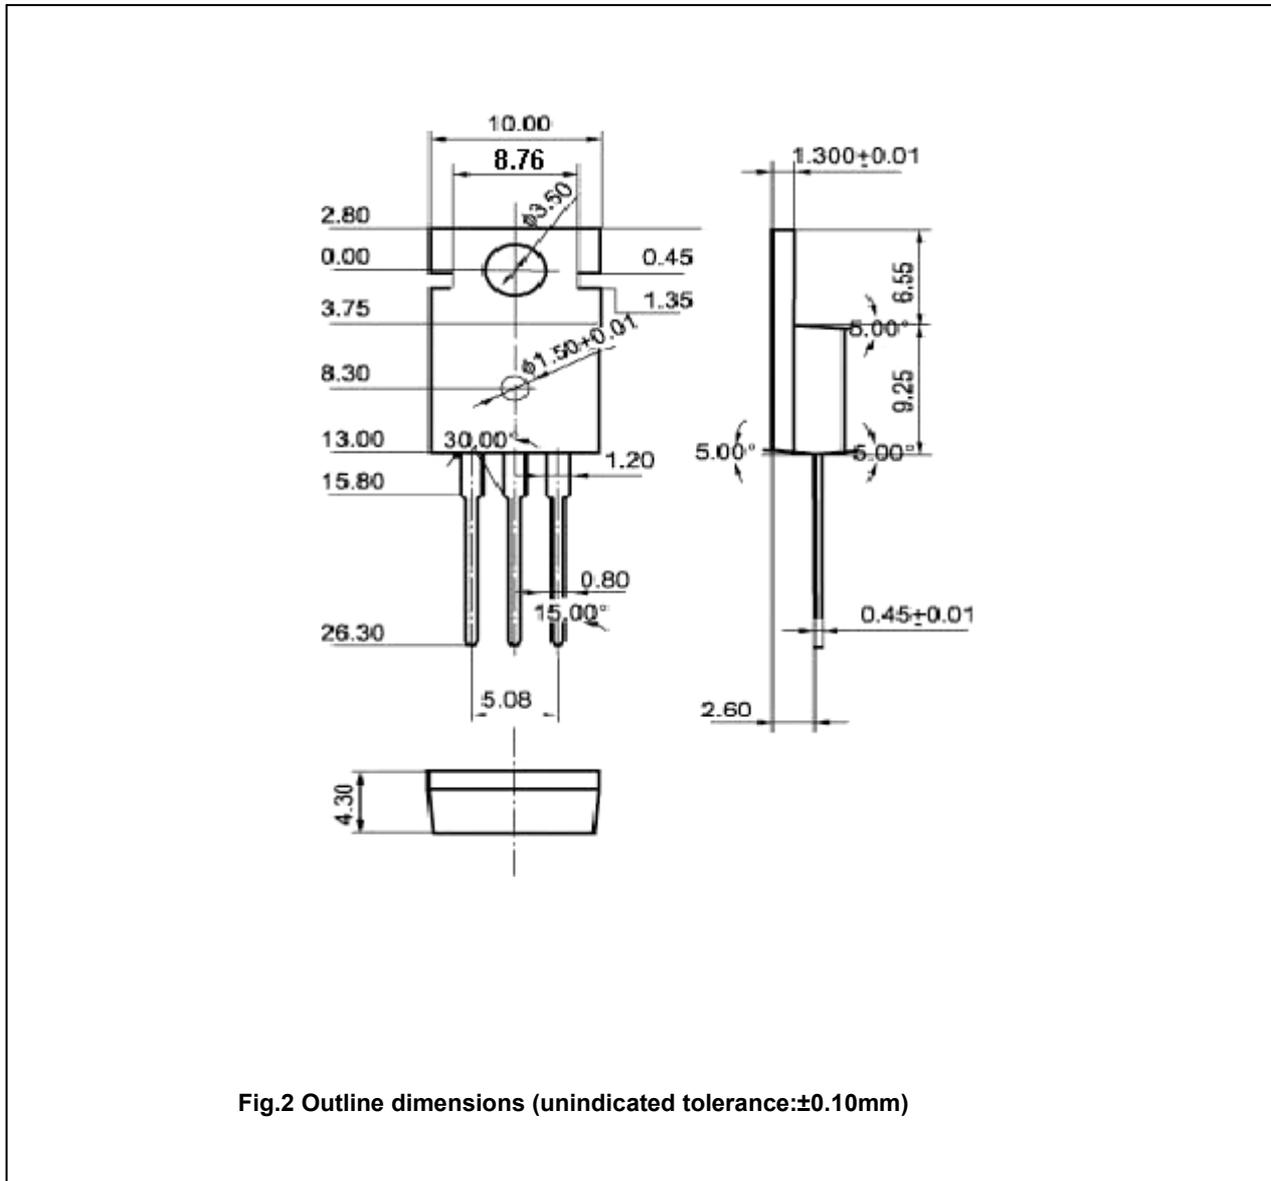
Outline dimensions (unindicated tolerance: ±0.10mm)
